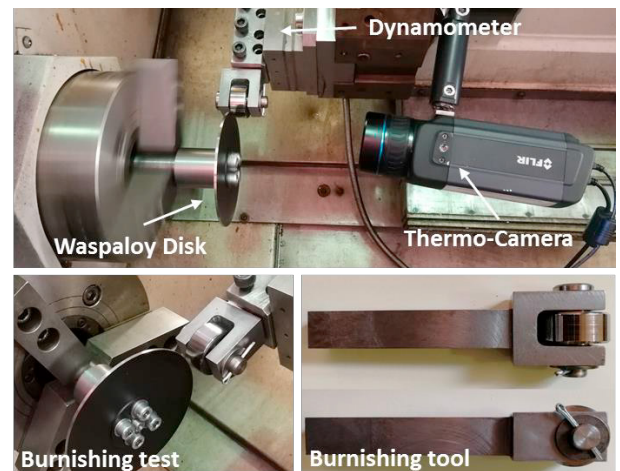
Experimental setup: disk, dynamometer and thermo-camera position and burnishing tool details.
